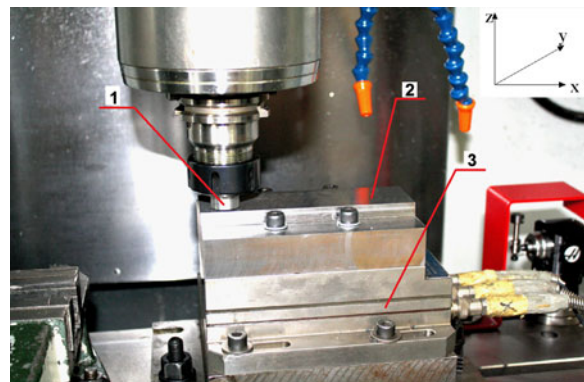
Interacting rubbing surfaces: 1—cylindrical rubbing pin, 2—sample with flat rubbing surface, 3—triaxial piezoelectric force gauge KISTLER type 9257A.
